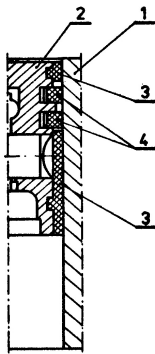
Sliding mechanism of cylinder and piston in compressor 1 – cylinder, 2 – piston, 3 – oil ring rails, 4 – piston packing rings
